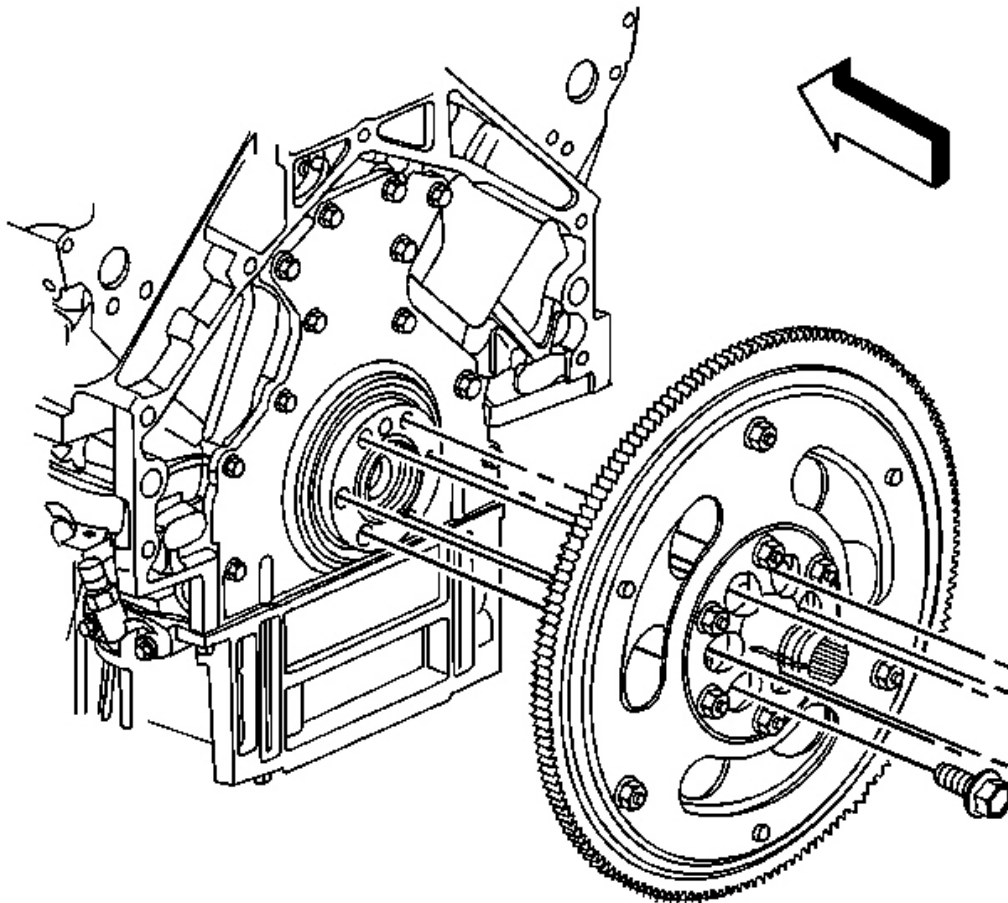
Automatic Transmission Engine Flywheel & Bolts
